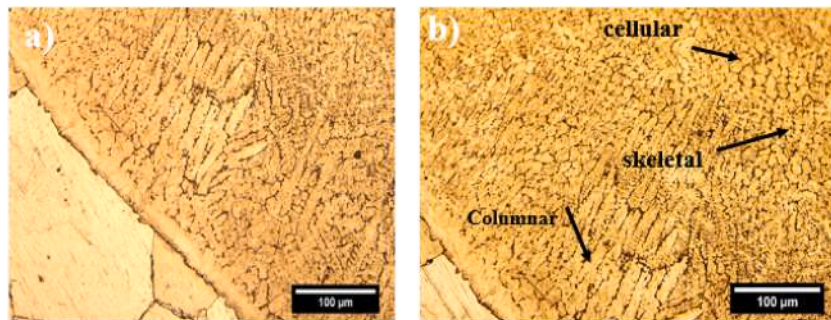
Weld fusion zone microstructure of AISI 420 stainless steel and AISI 1060 at a) fusion line of AISI 420, b) center of fusion zone.
